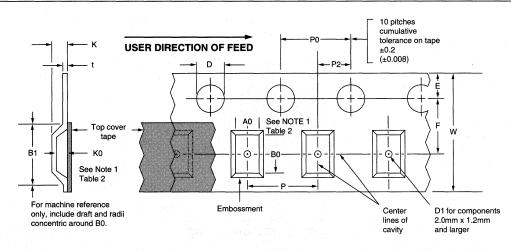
EMBOSSED CARRIER DIMENSIONS (24mm tape only)
